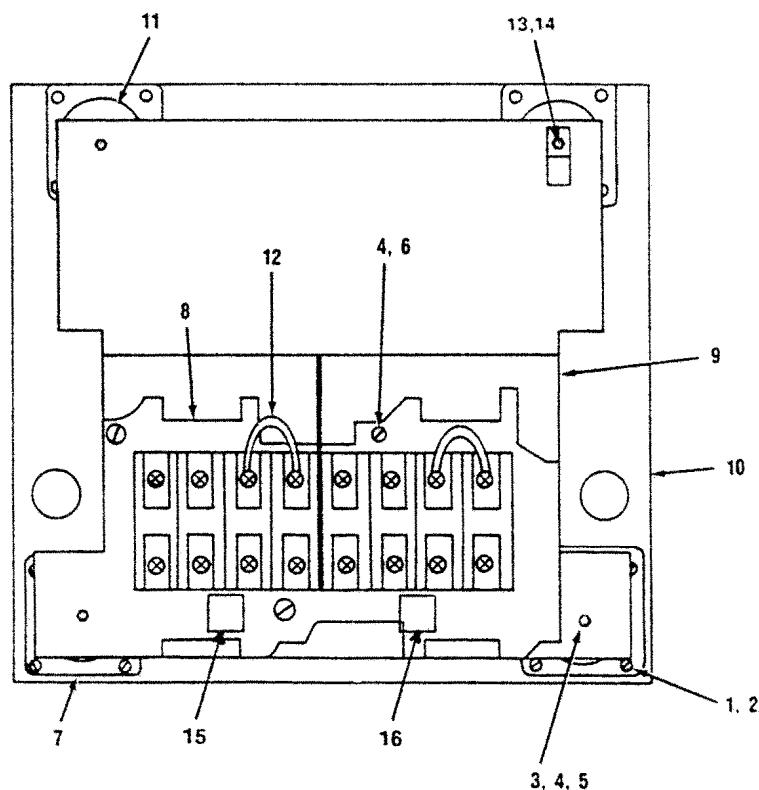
Contactor Assembly (N451161-5303) Parts Location
